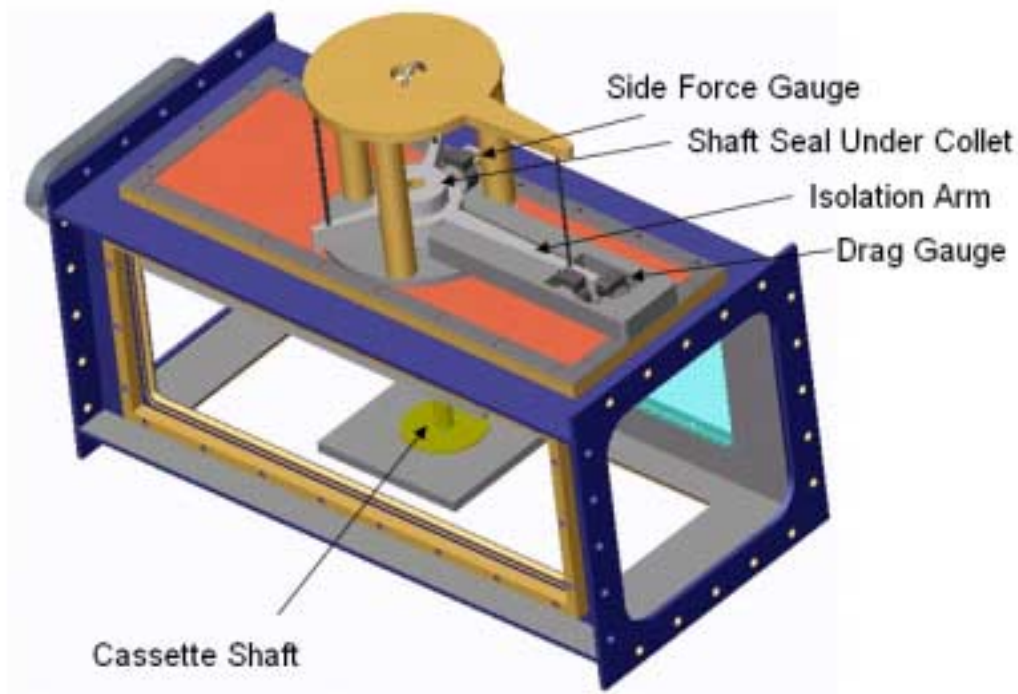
3D model of underside view of dynamometer, base plate, and cassette assembly [1]
